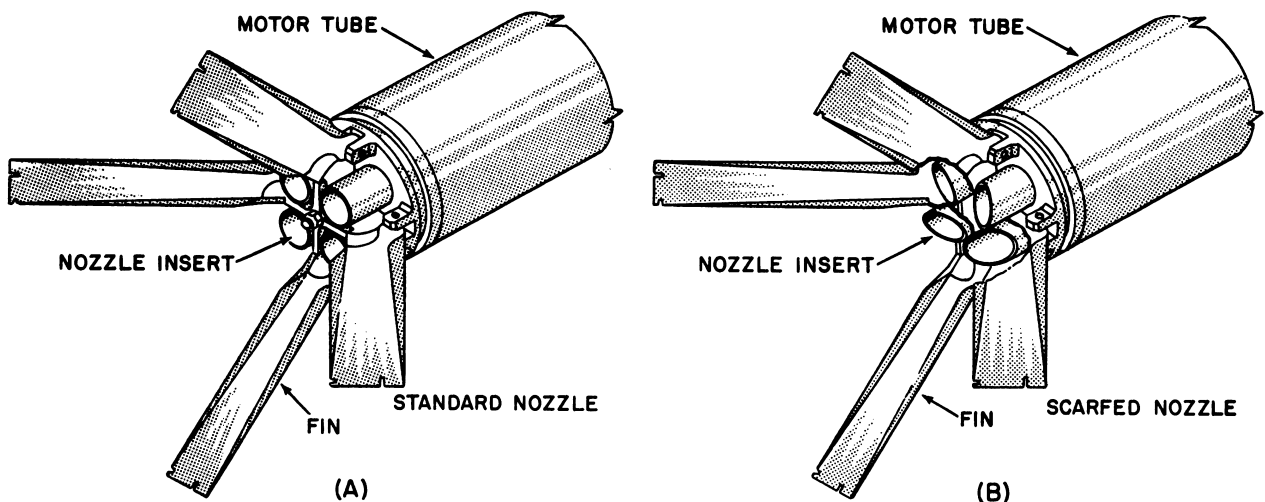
Nozzle and fin assemblies. (A) Mk 4 Mods motor; (B) Mk 40 Mods motor.
